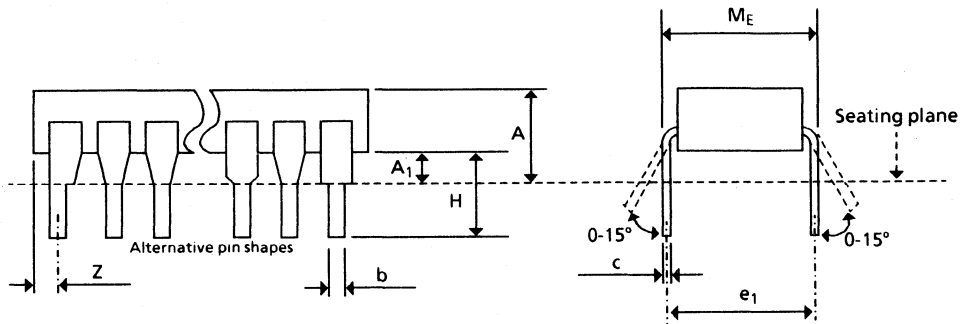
& b. 22-Lead Ceramic DIL (solder seal) - package style C
